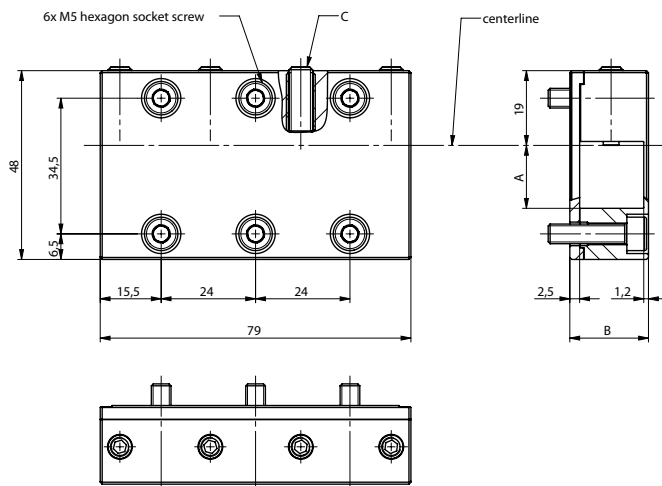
Machine adapter with HSK-T63 for disk-type turret with HSK-T clamping unit, Type 9119AH63S
